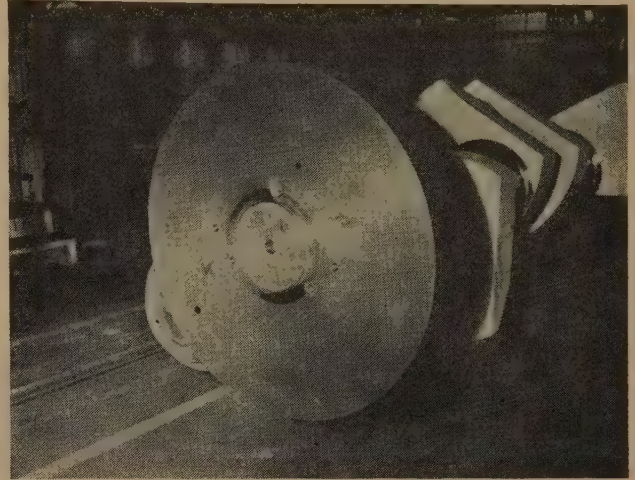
32-IN-DIAM DAMPER MOUNTED ON CRANKSHAFT
